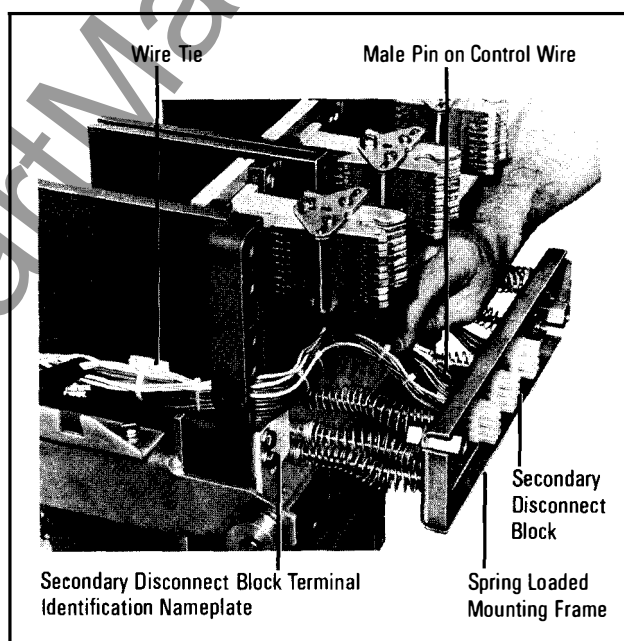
Typical Control Wire Connections to Secondary Stab Block on a Drawout Breaker
